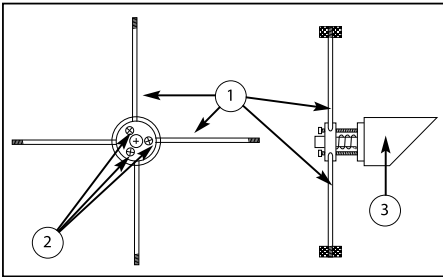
Secondary Mirror Assembly (front and side view). Spider vanes (1); tilt screws (2); secondary mirror holder (3).
